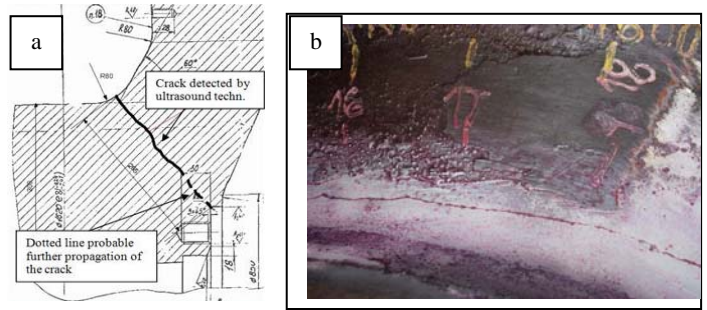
Horizontal shaft crack; b Shaft to flange transition radius; Damaged protective coating and shaft material crack along the perimeter
